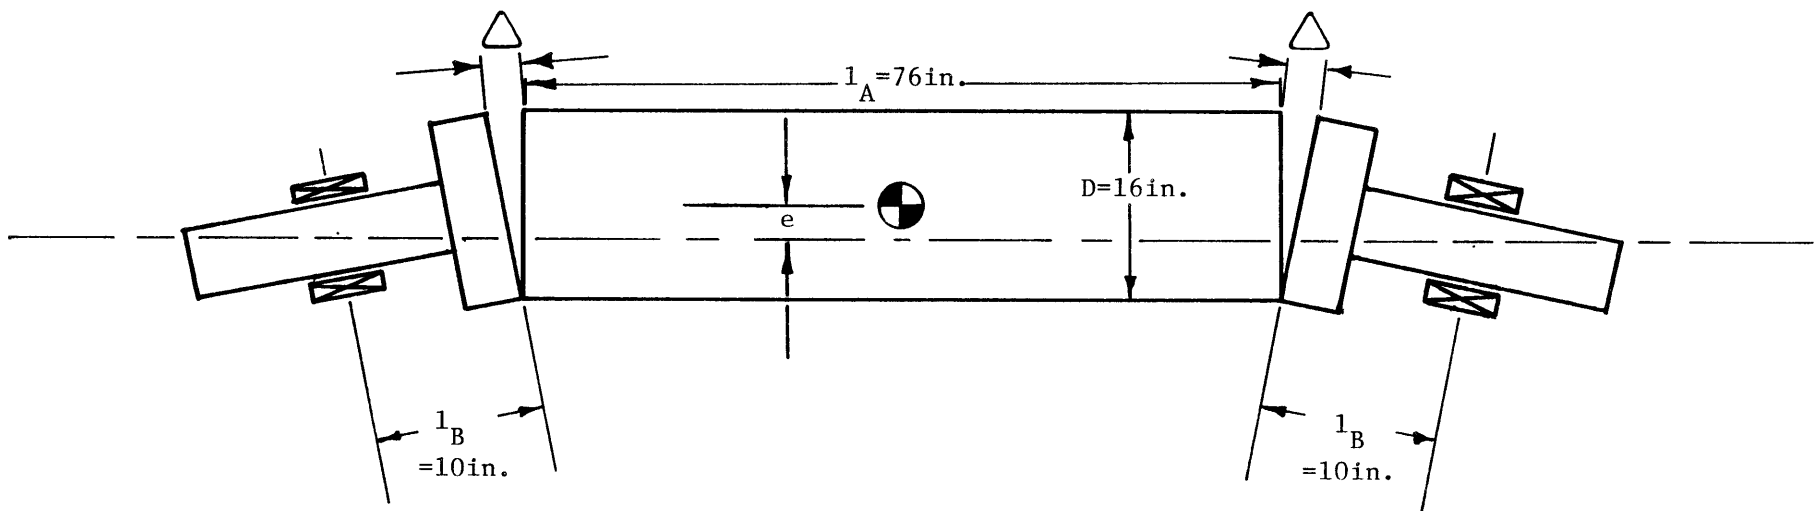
UNBALANCE CAUSED BY MISALIGNED ROTOR ASSEMBLY
